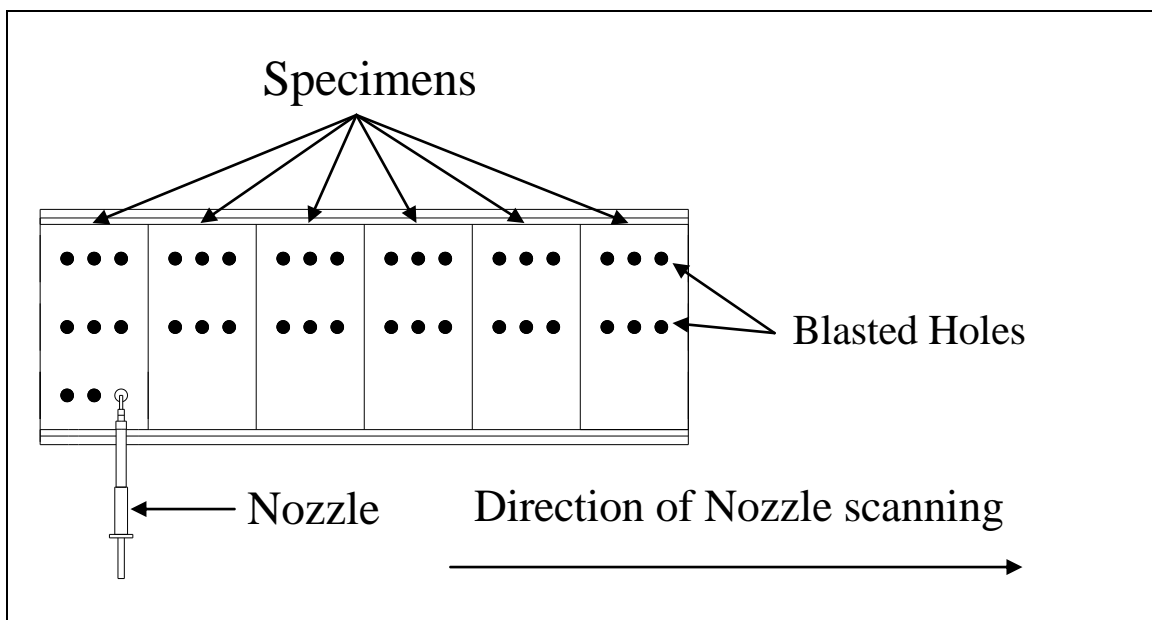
Configuration of nozzle and specimens while blasting the holes
